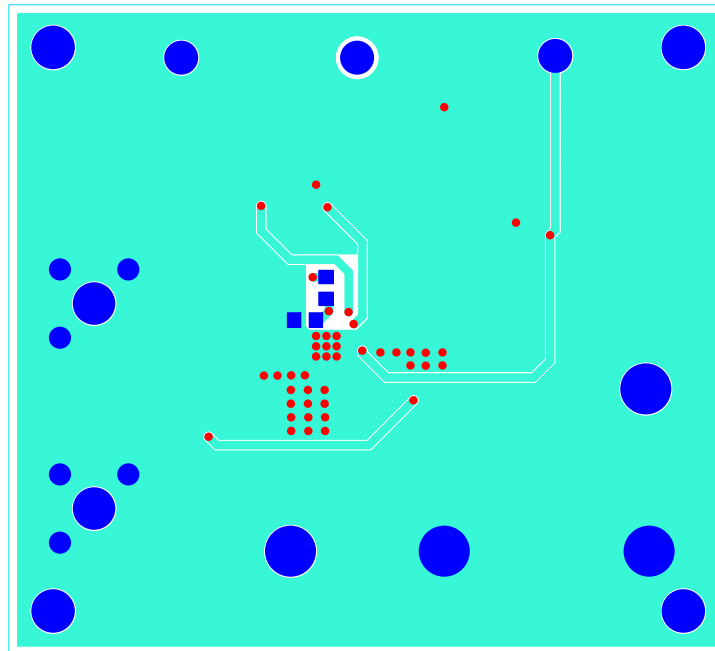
BOTTOM LAYER ETCH (MIRROR)
